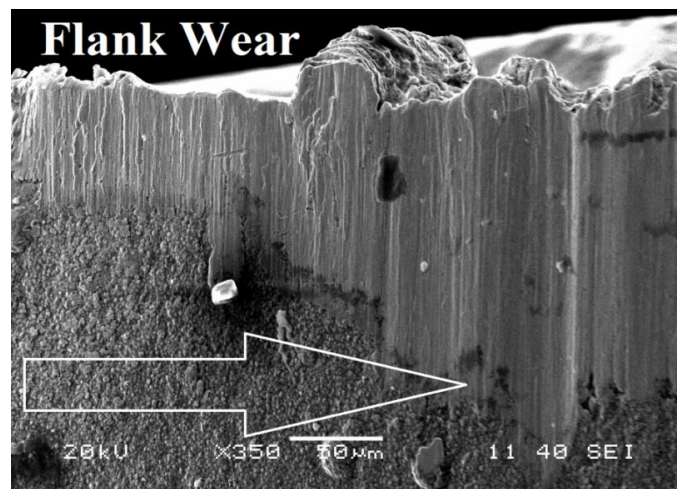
(b) Flank wear of CVD coated WC insert at spindle speed of 421 RPM, depth of cut of 1 mm and feed rate of 0.20 mm on left side of tool tip
